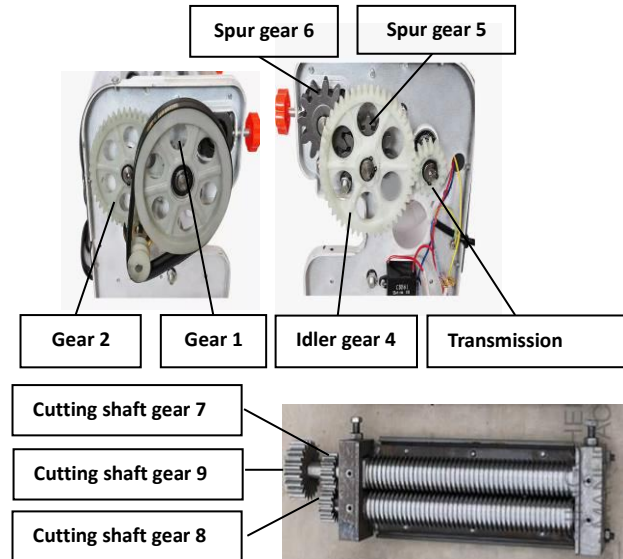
Cutting shafts and compound gear train of portable noodles-making machine
